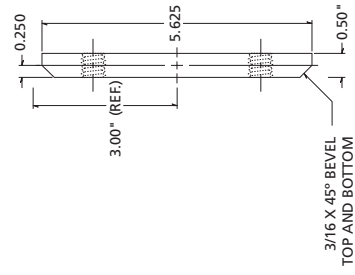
" x 6" RAIL WITH WELDED PLUG SIDE ELEVATION Q4
